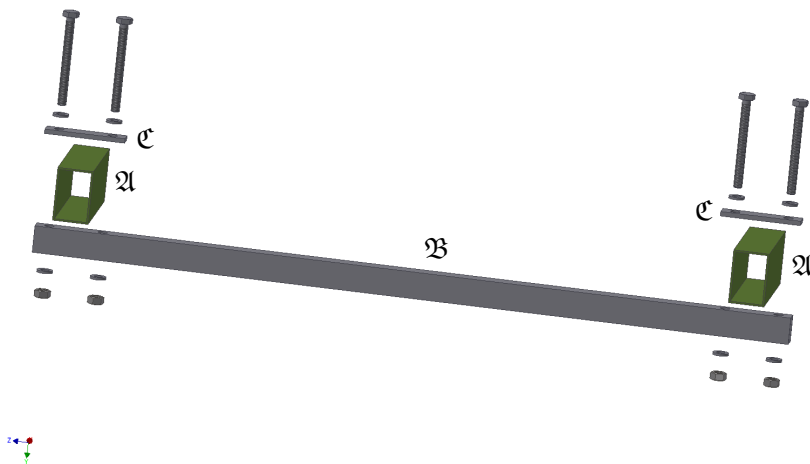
Lower Assembly for Moving the NAC Machine — If a pallet truck is used to move the machine along its long axis, the frame (A, green) can be equipped with trusses (B) clamped by counter plates (C). Up to three sets of the assembly can be used for transportation.
